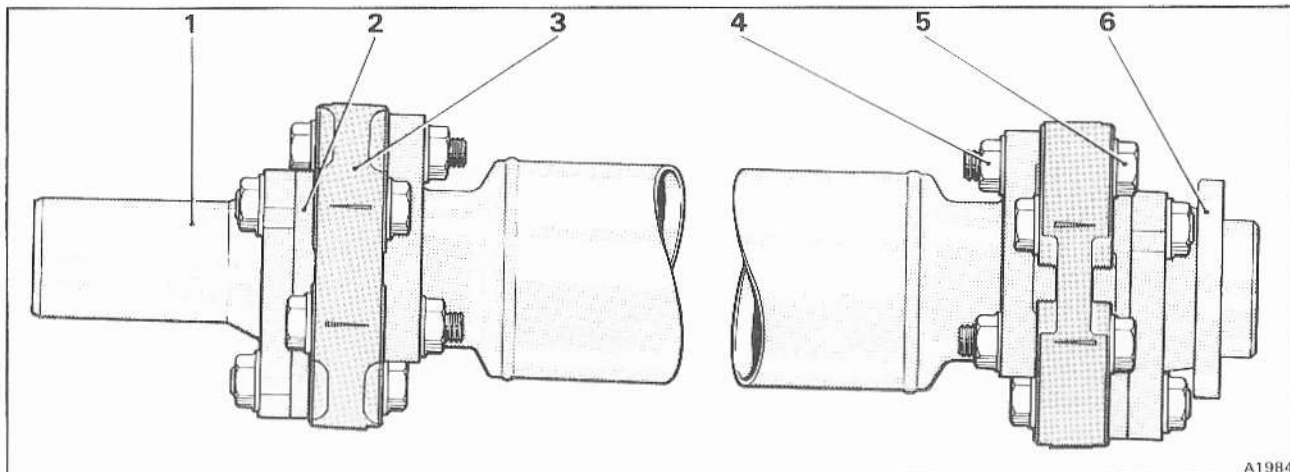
Propeller shaft/rubber flexible couplings – Gearbox and final drive
